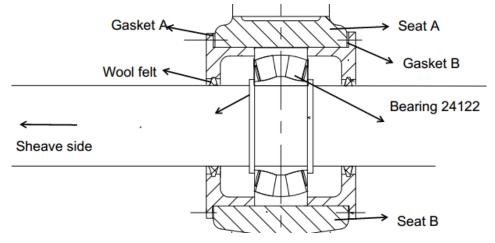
Remove Bearing seat A, wool felt and gasket A (Note: this is a side view)
